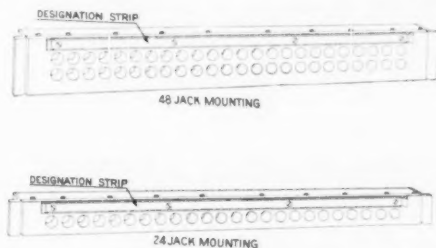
Typical Assembly of Jack Mounts for Panel Mounted Test Board
